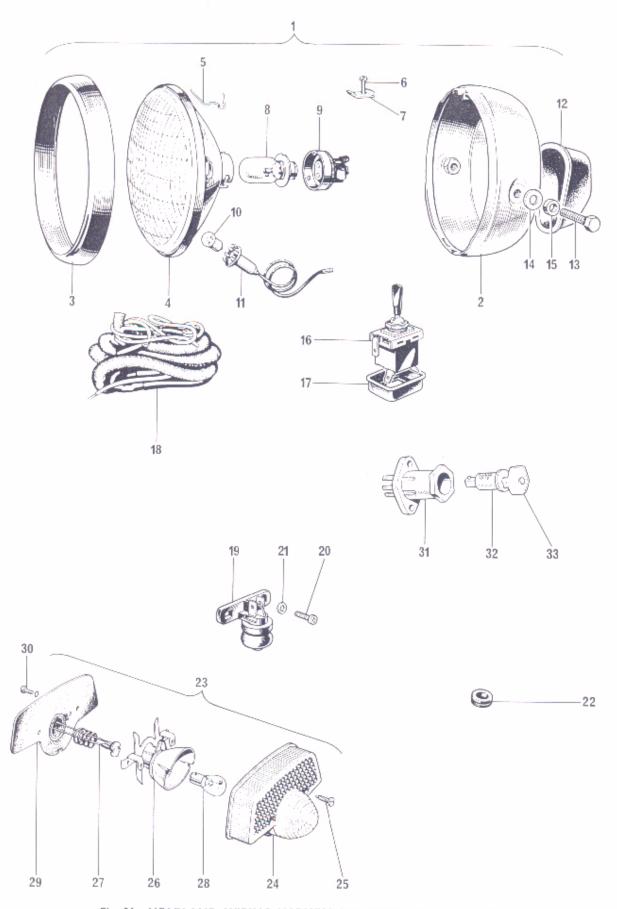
HEADLAMP, WIRING HARNESS SWITCHES AND TAIL LAMP
